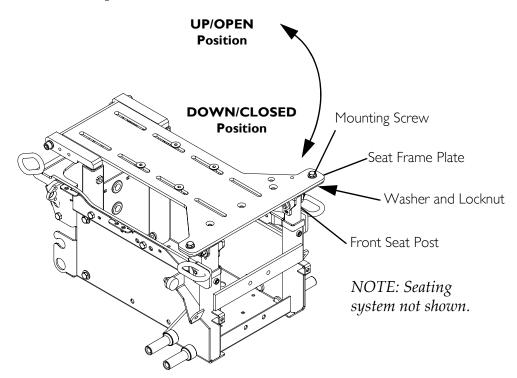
Tilting the Seat Assembly - Wheelchairs without Latch Bar Only
